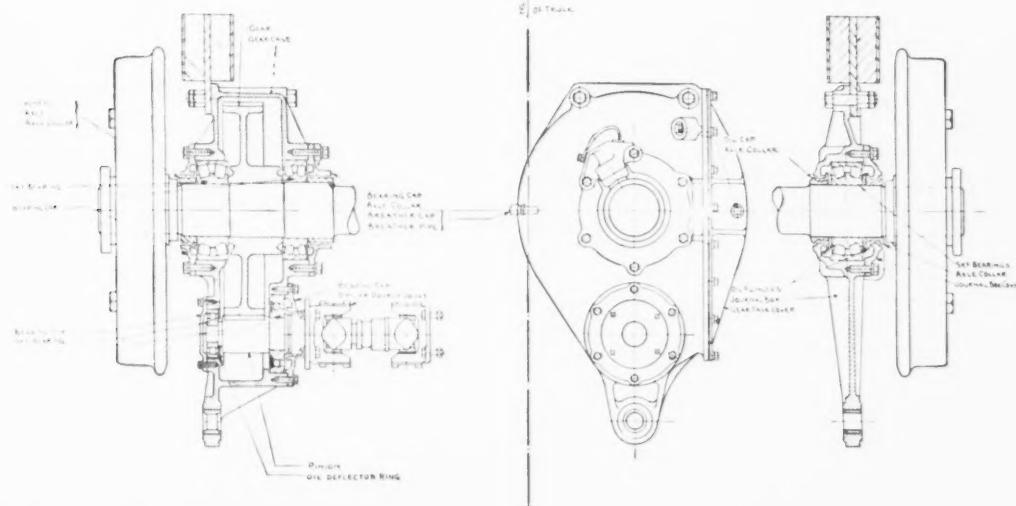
Gear drive assembly for Brilliner electric trolley truck.
